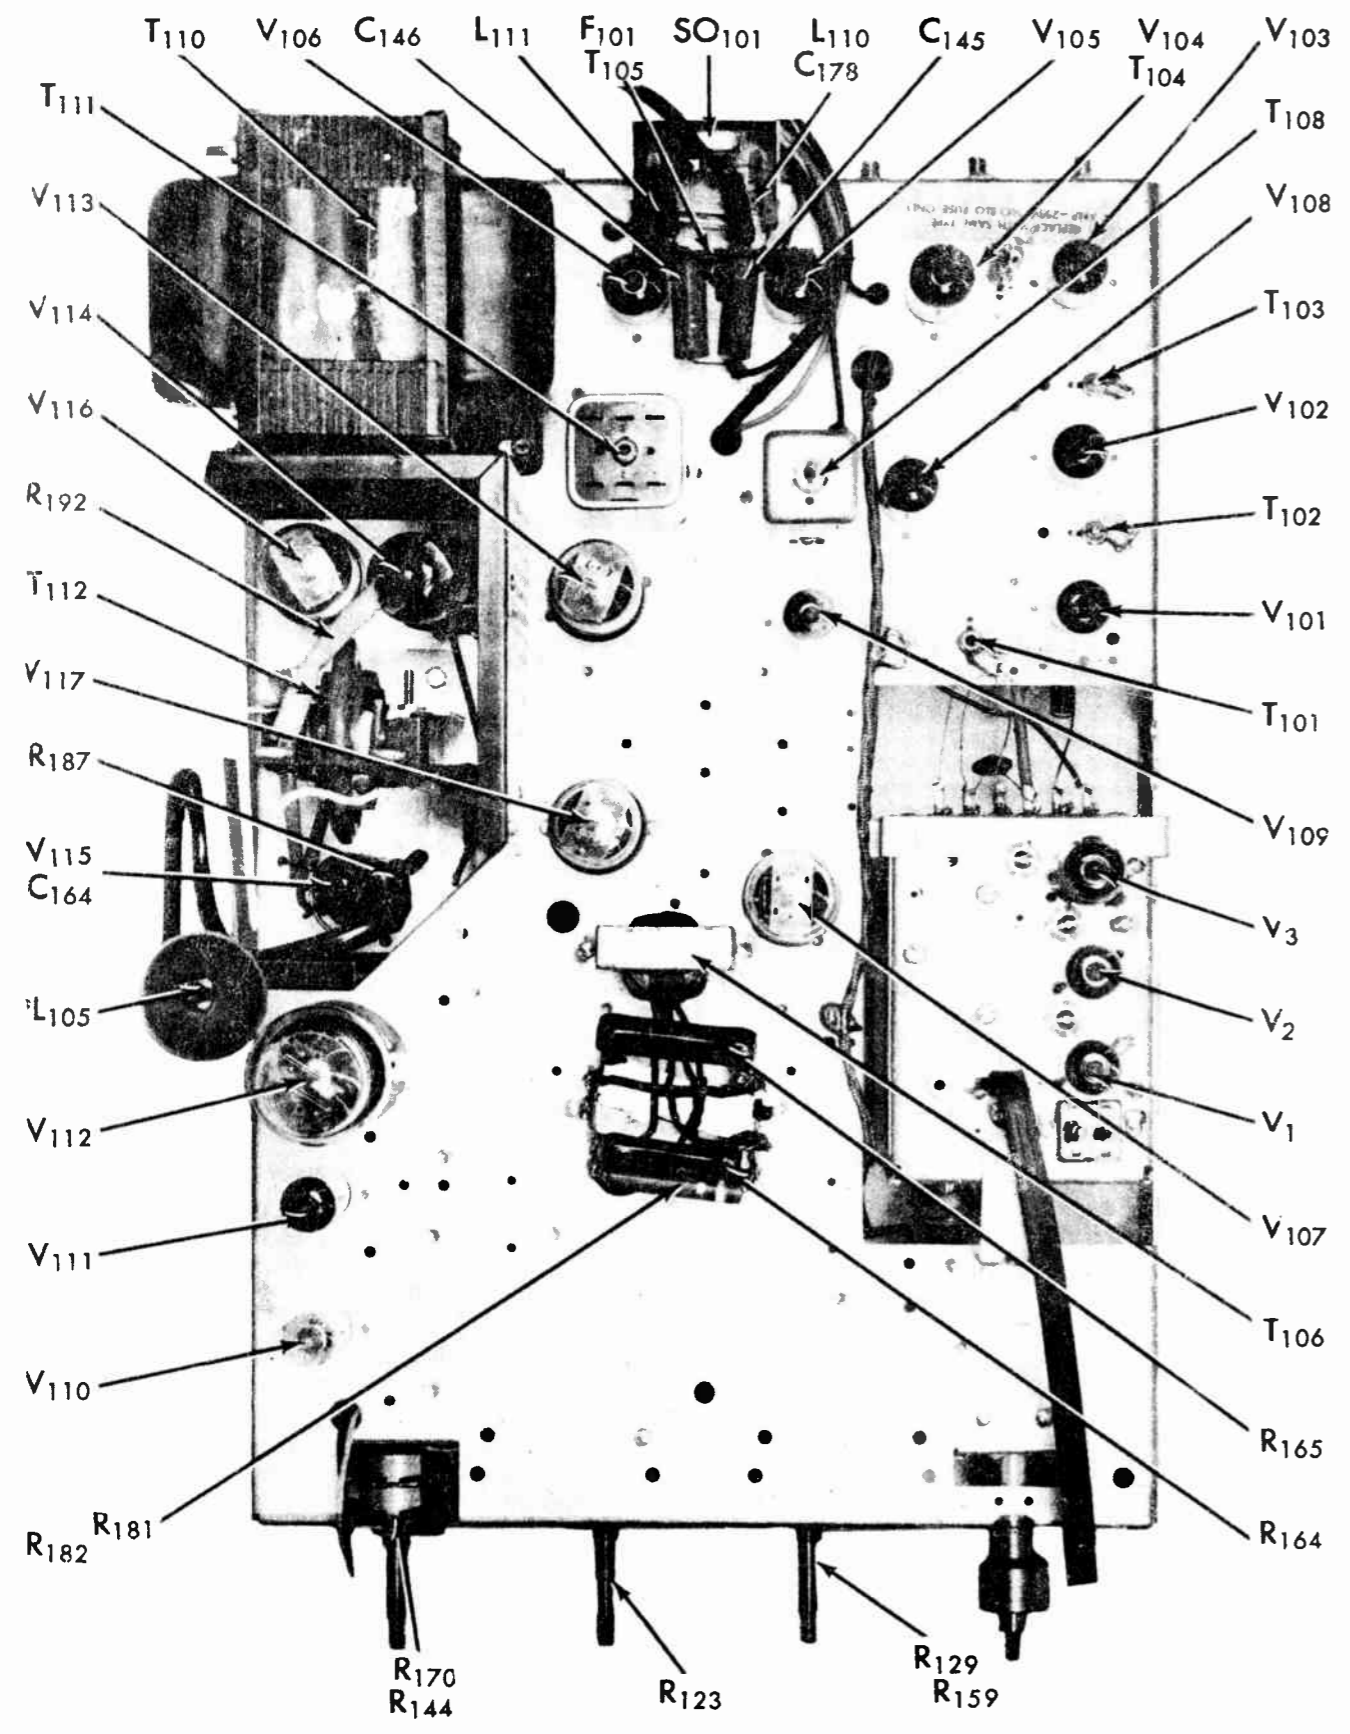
TOP VIEW - COMPONENT LOCATION 92X1036
